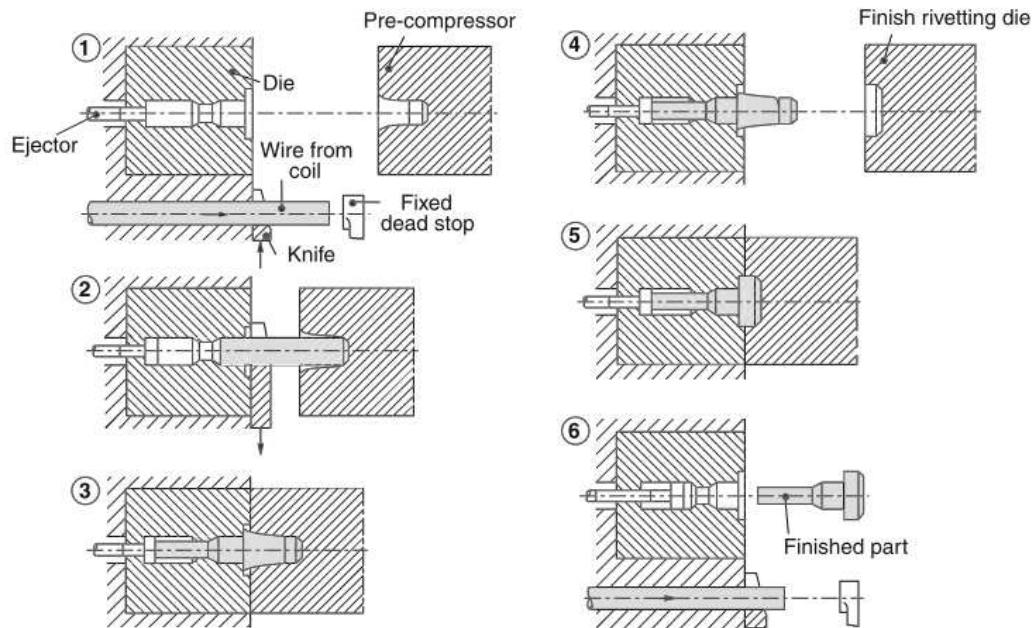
Example of a bolt manufacturing process using cold upsetting [11]
